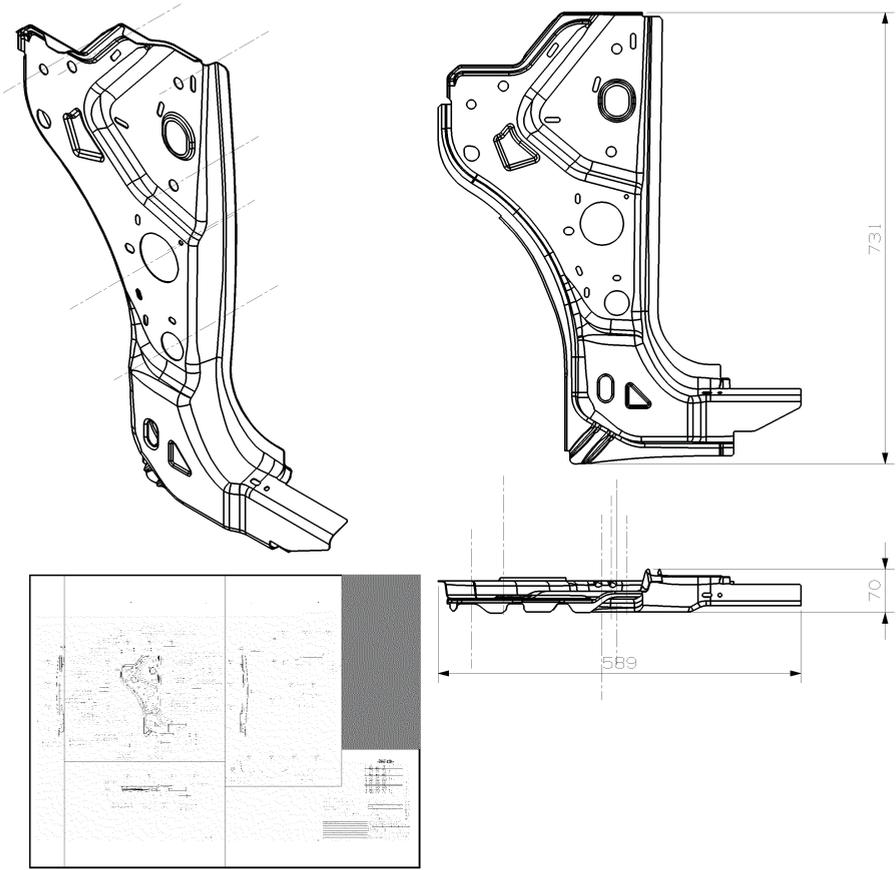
Part of the drawing showing a simplified 3 D sketch, useful to show overall dimensions. The lay-out on the actual drawing is different for the limited space available.
